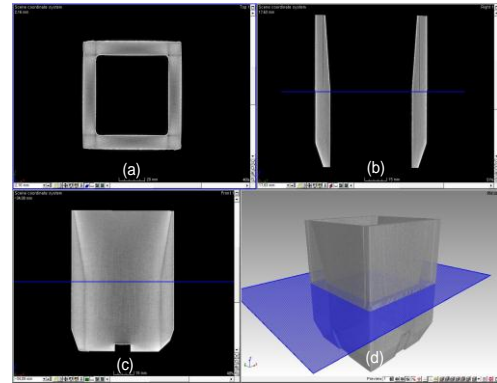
Sample images of side plate to end fitting made by CT: (a) front, (b) side, (c) top view and (d) 3D image.
